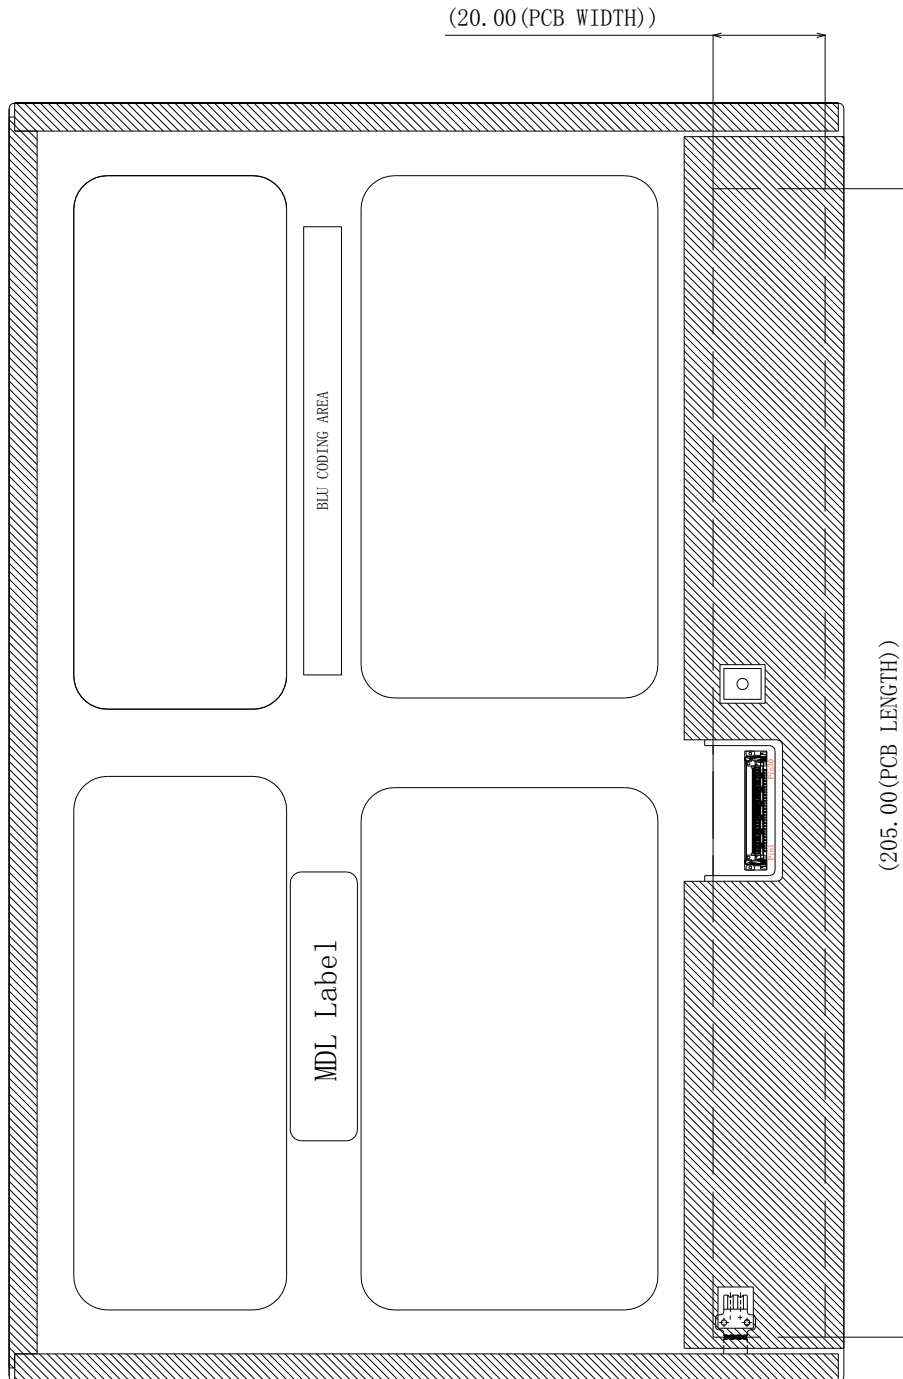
TFT-LCD Module Outline Dimensions (Rear view)
